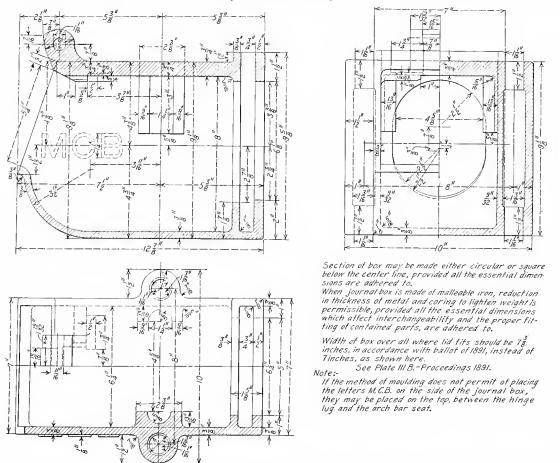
M. C. B. Standard Box and Contained Parts for 334 in. by 7 in. Freight Car Journal. (M. C. B. Sheet 1.)
